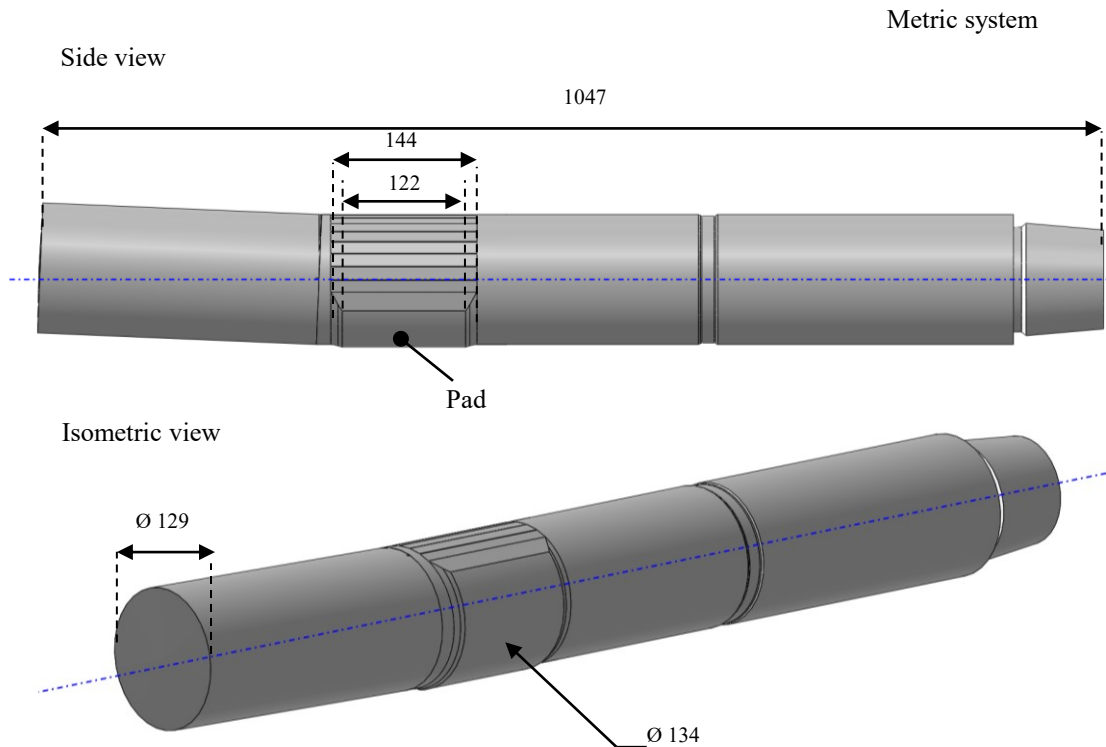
Side view and isometric view of a sample fixed bend with length and diameter dimensions in mm
